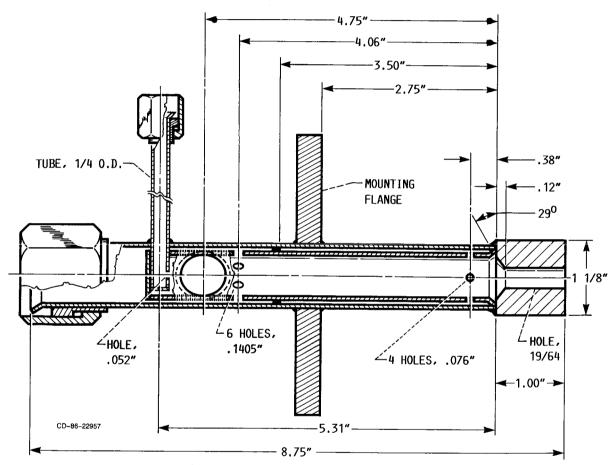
HYDROGEN-AIR TORCH ASSEMBLY.
